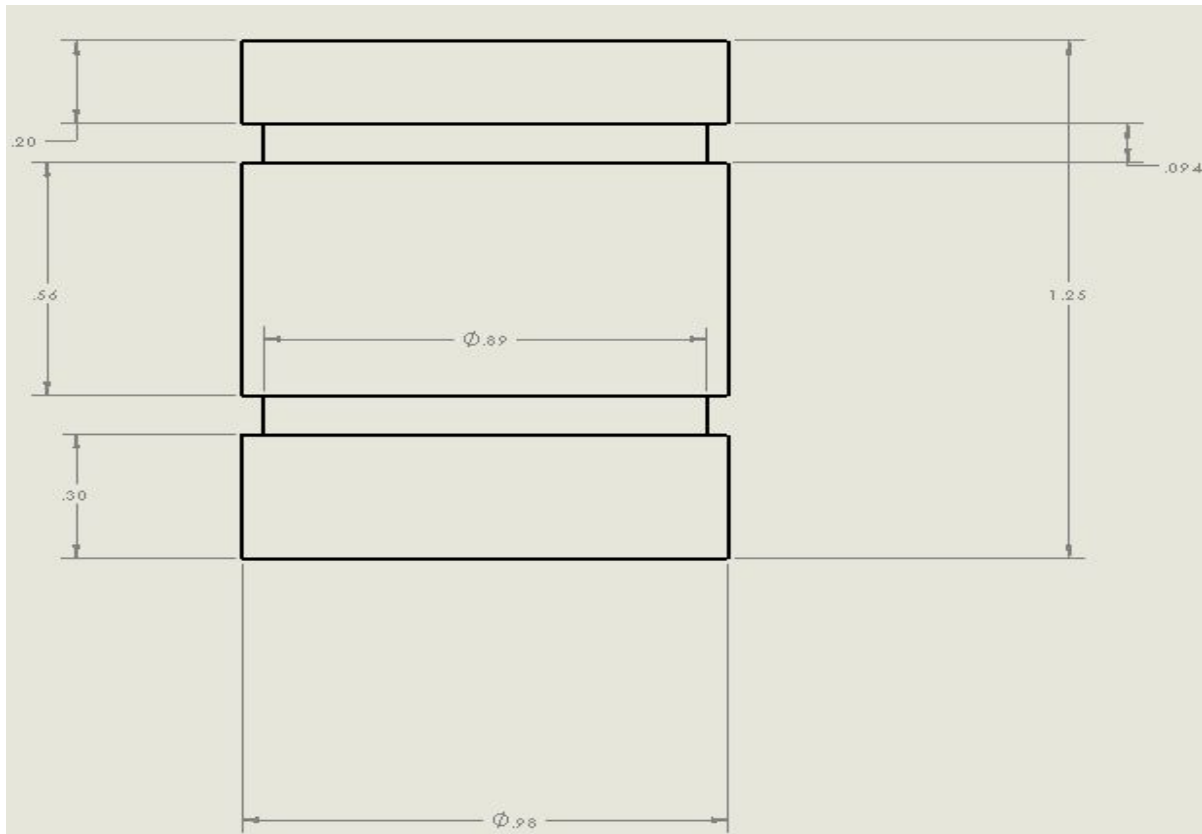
Solidworks generated engineering drawing of the final piston design with associated dimensions (by Drew Miller).
